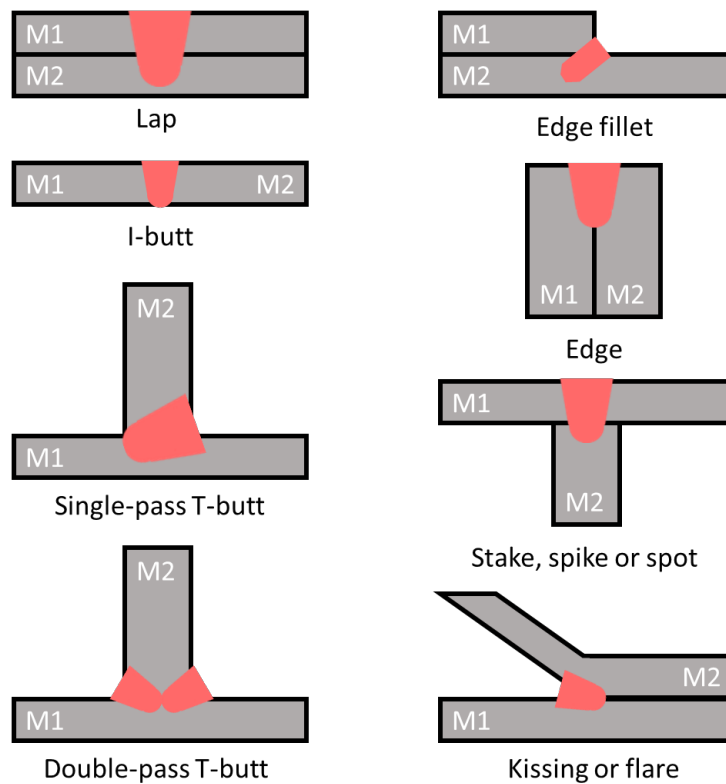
Scheme of the different possibilities of joint configuration in laser welding [71].
